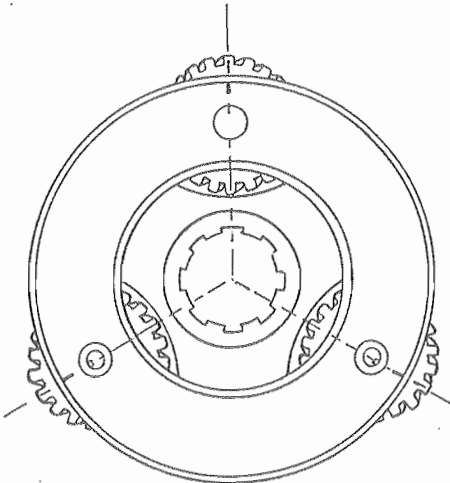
PLANET CARRIER AND GEAR TRAIN SHOWING ETCHED LINES
